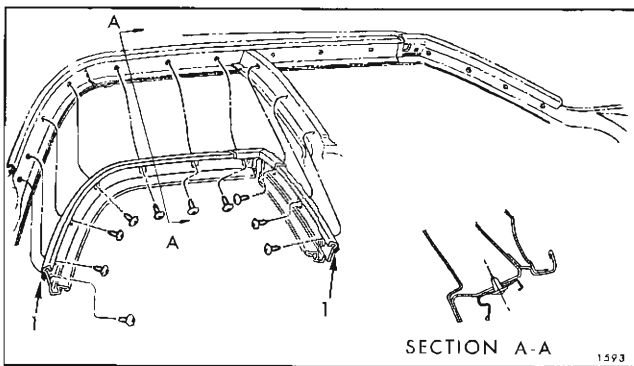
D28—Side Roof Rail Weatherstrip Retainer - "69" Style shown - "39" Similar
